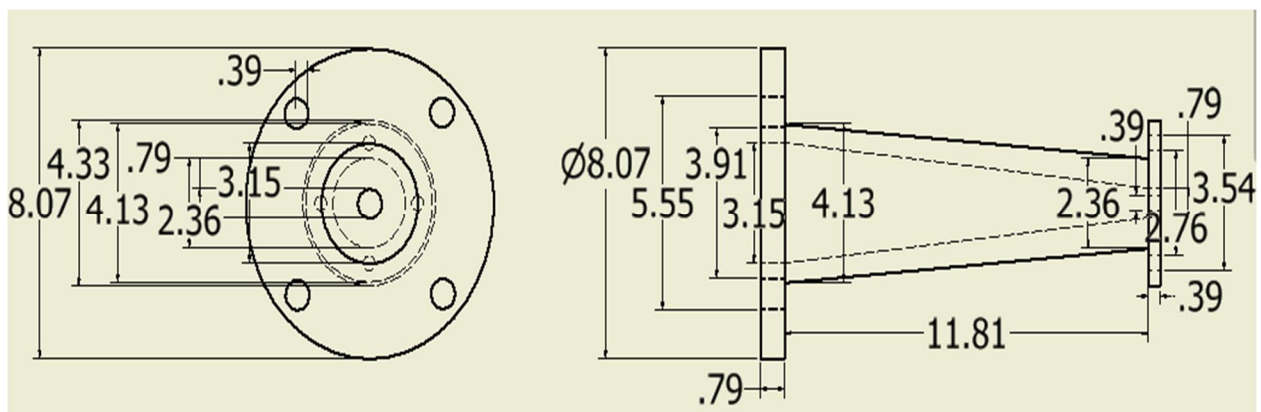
Sectional view of flange for recycling unit with dimensions
